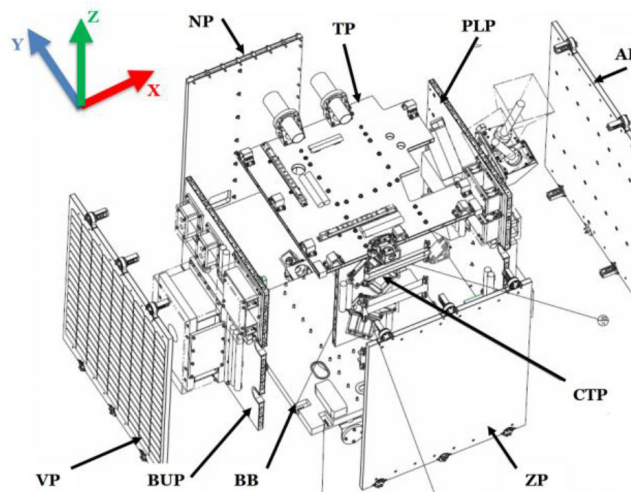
Exploded view of the PROBA-V STM [6]. Courtesy of ESA and Redwire Space NV
